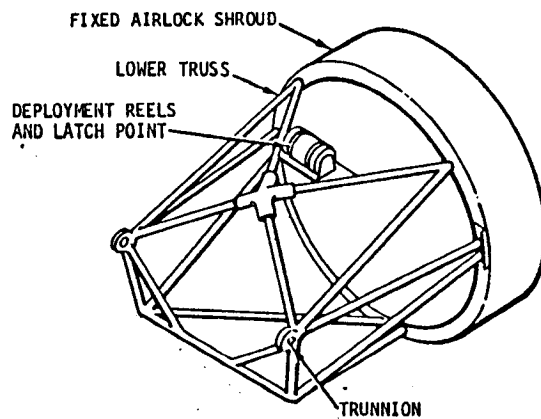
Fixed Airlock Shroud, Deployment Assembly
